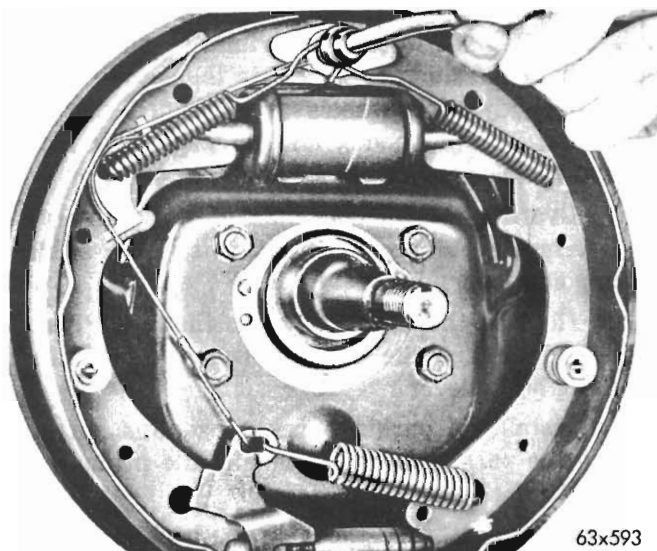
Removing shoe return spring using Tool E5C20 (typical view of right front brake).
